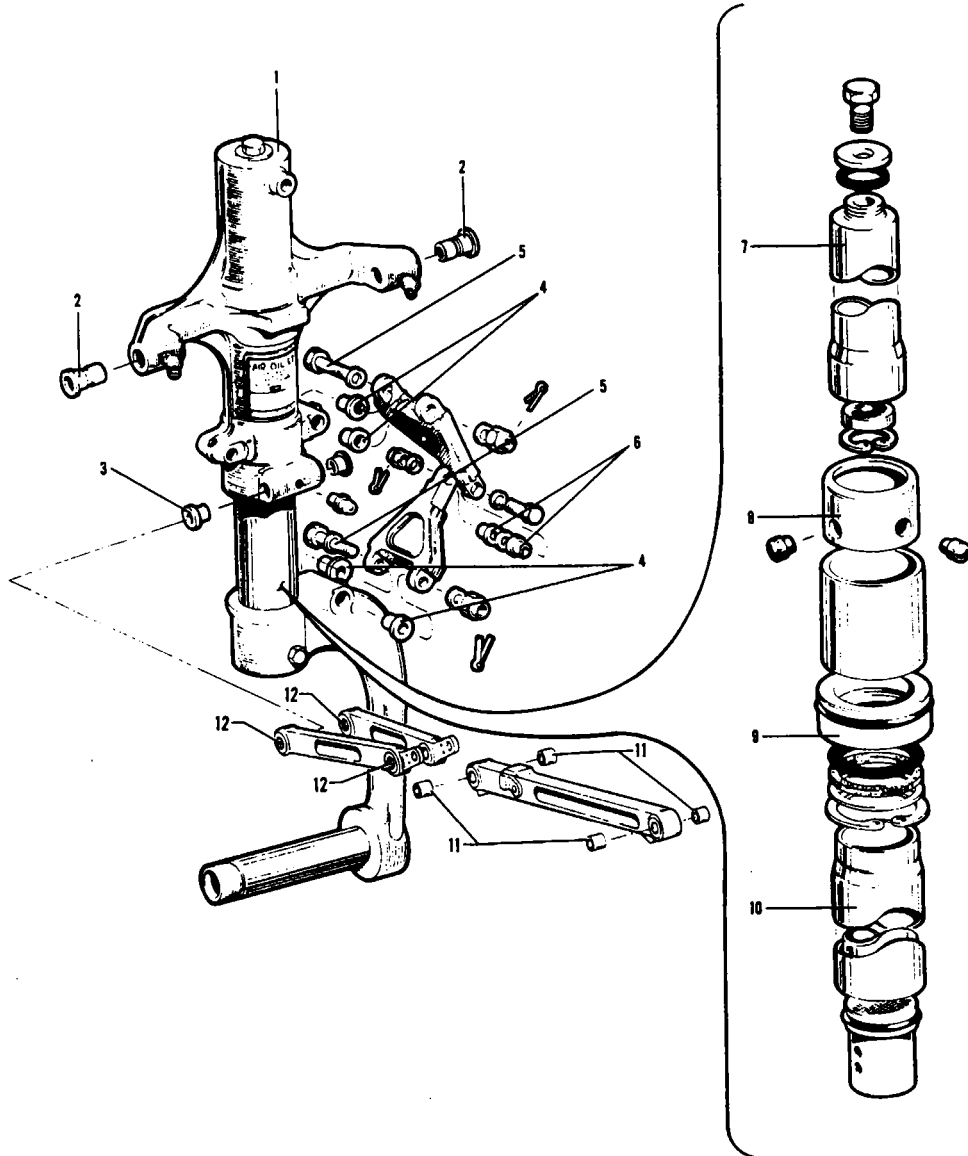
Main Gear Oleo Service Tolerances
